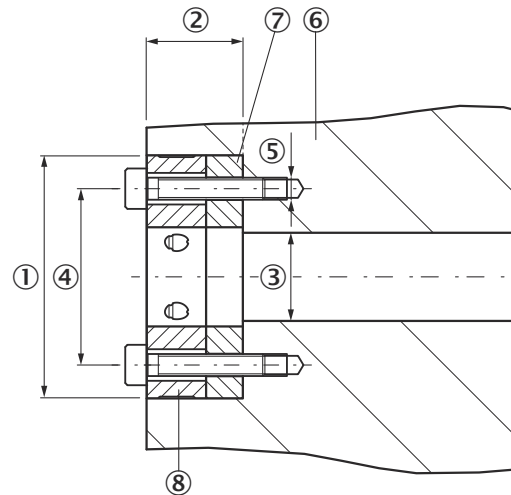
Preparation for ring magnet and C-magnet in piston rod with screw connection in magnetizable material
